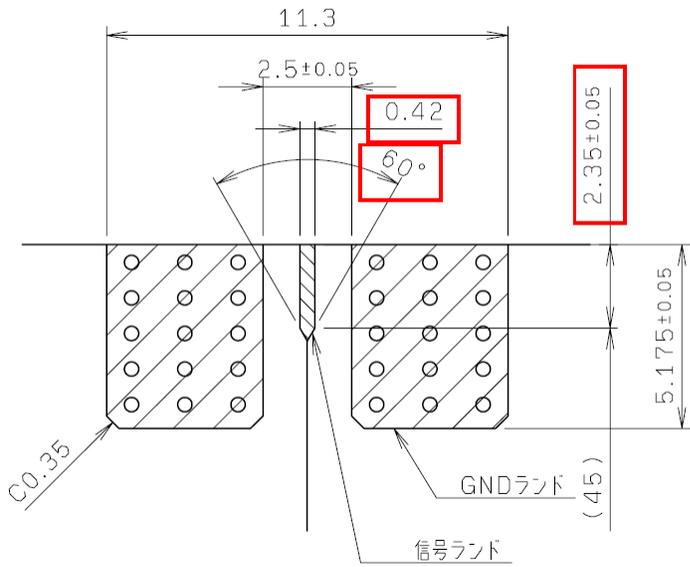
Detail of Top-side SMA End Launch Connector Pad
